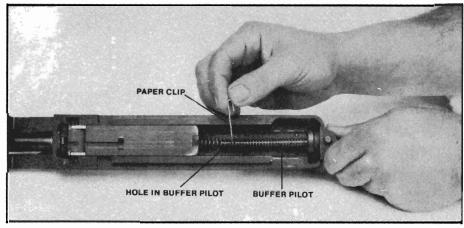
Using paper clip to hold compressed spring on buffer pilot.
